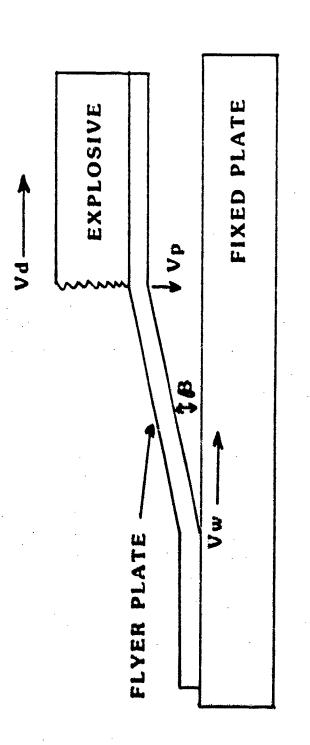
Schematic Diagram of Explosive Welding Progress.
